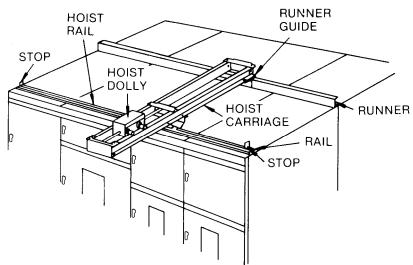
Breaker hoist assembly on indoor switchgear
